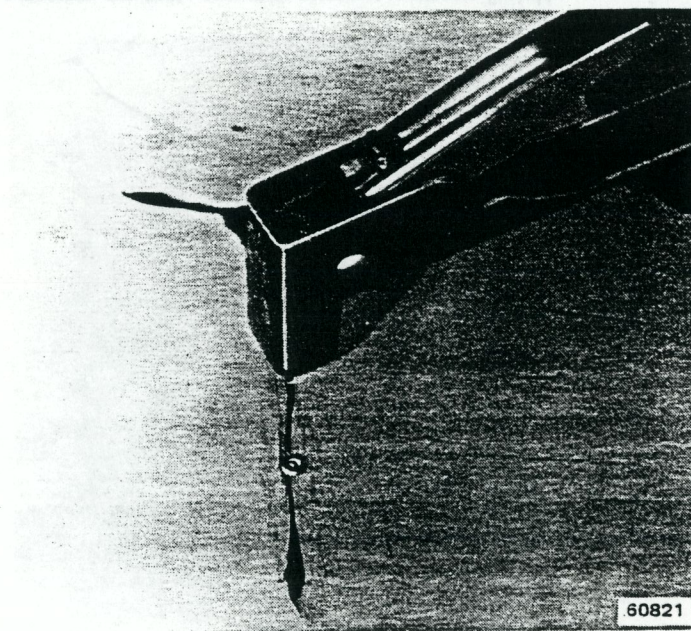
L-6 Installing Pop Rivets in Crack
